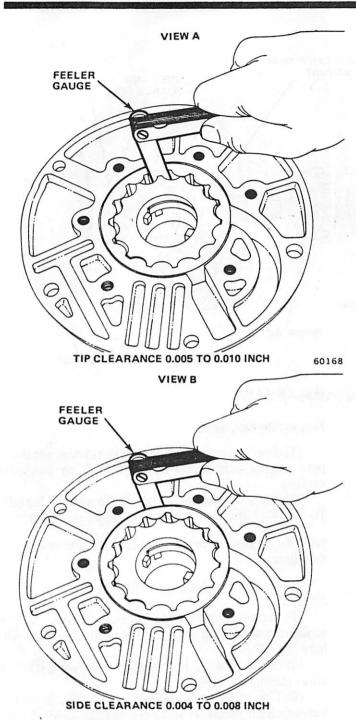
C-52 Measuring Rotor Clearance-Model 999
